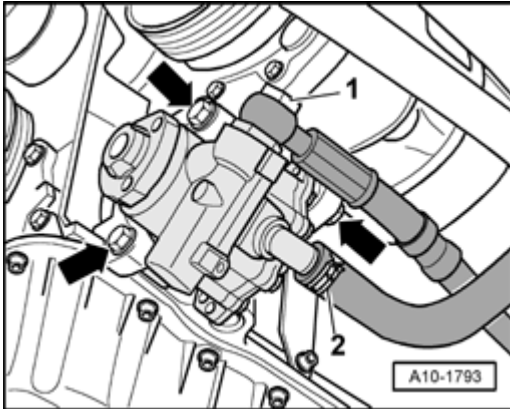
Removing Bolts And Power Steering Pump From Bracket
